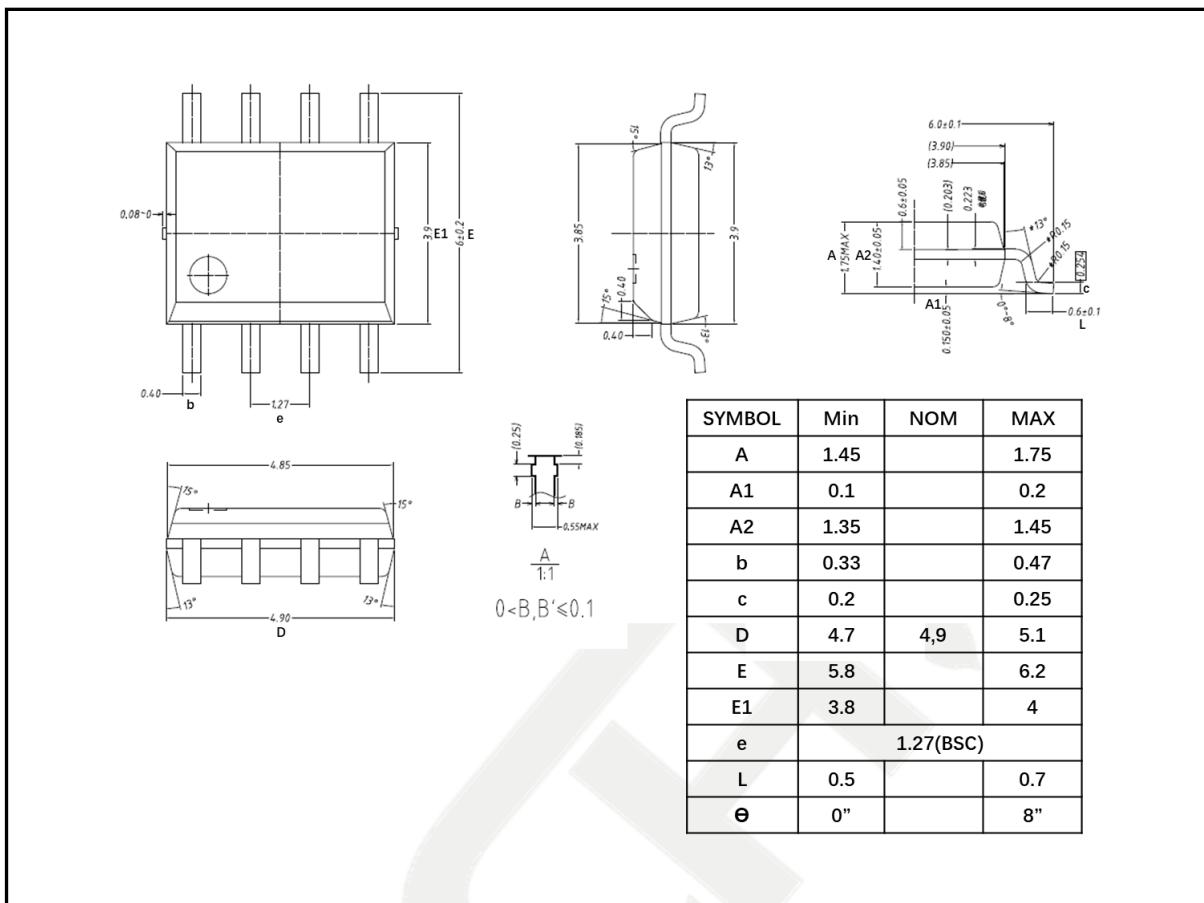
SOT23-8L Mechanical Data and Package Dimensions
